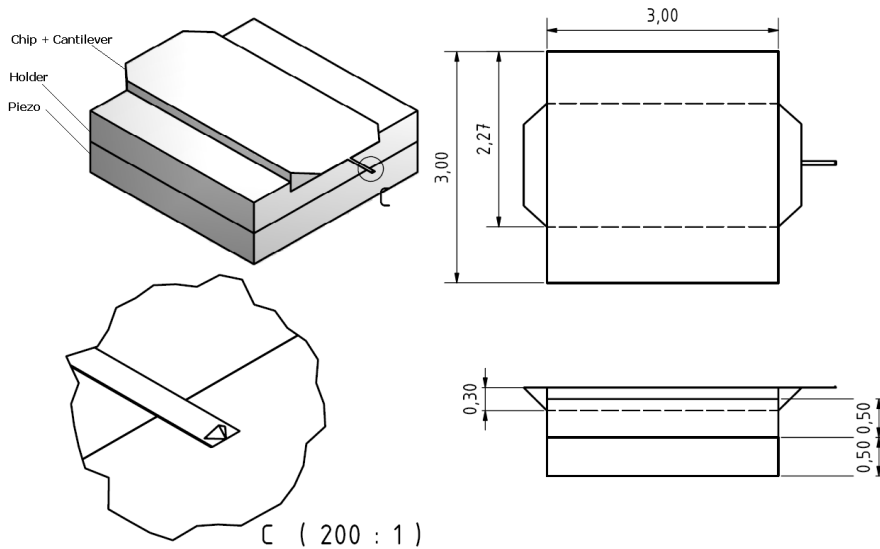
CAD Model of the geometry objects. The dimensions are given in millimeters.
